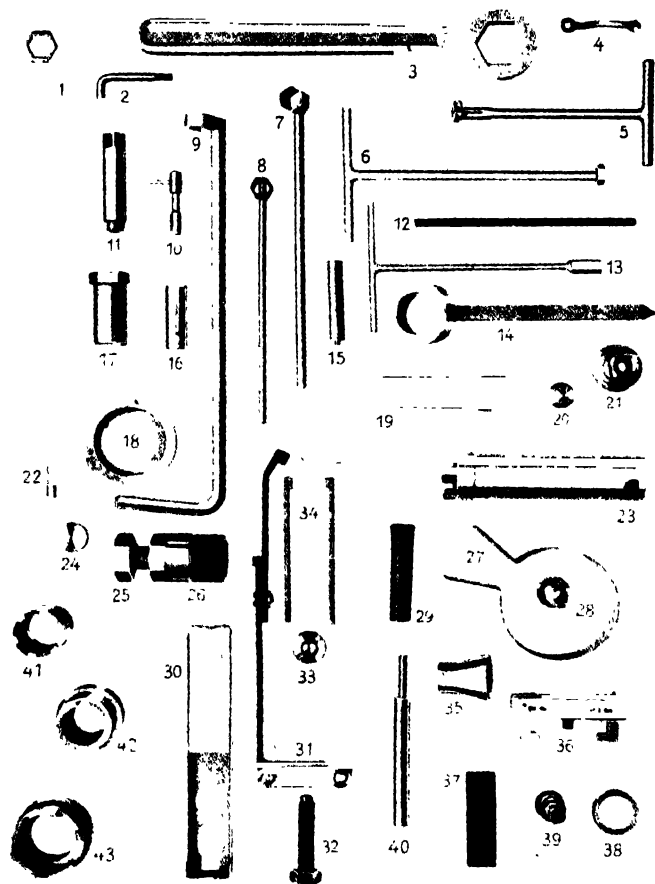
Illustration Showing Special Tools Used in Dismantling and Assembling Siemens-Halske Engines.
